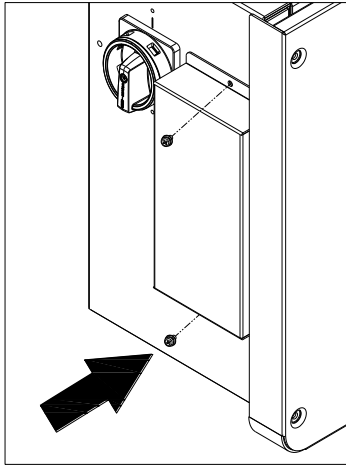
Secure the Main Enclosure and Wiring Box to the Bracket
